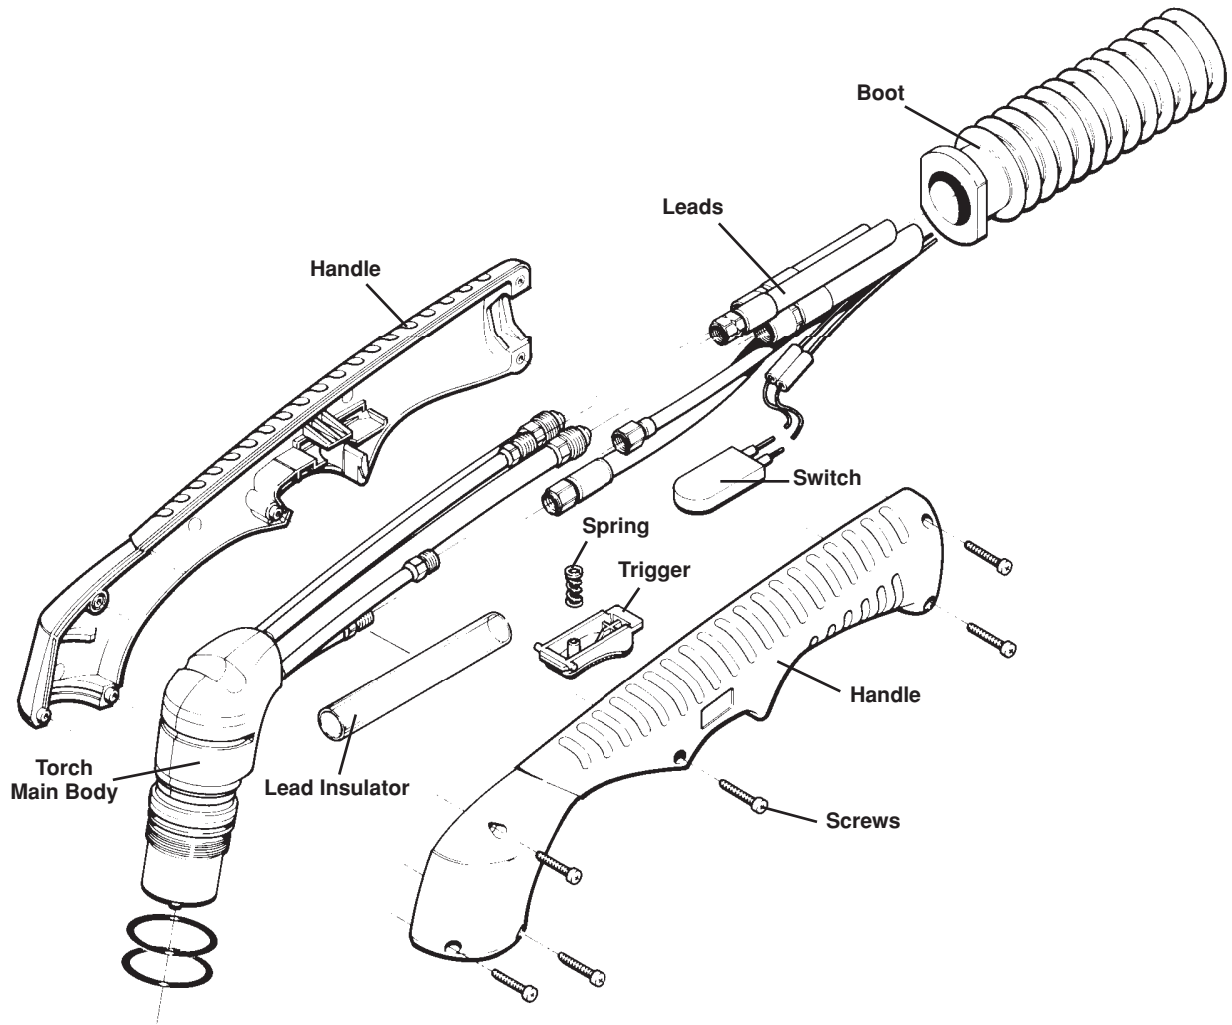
PAC200T (90°) Cutting Trigger Torch Assembly
